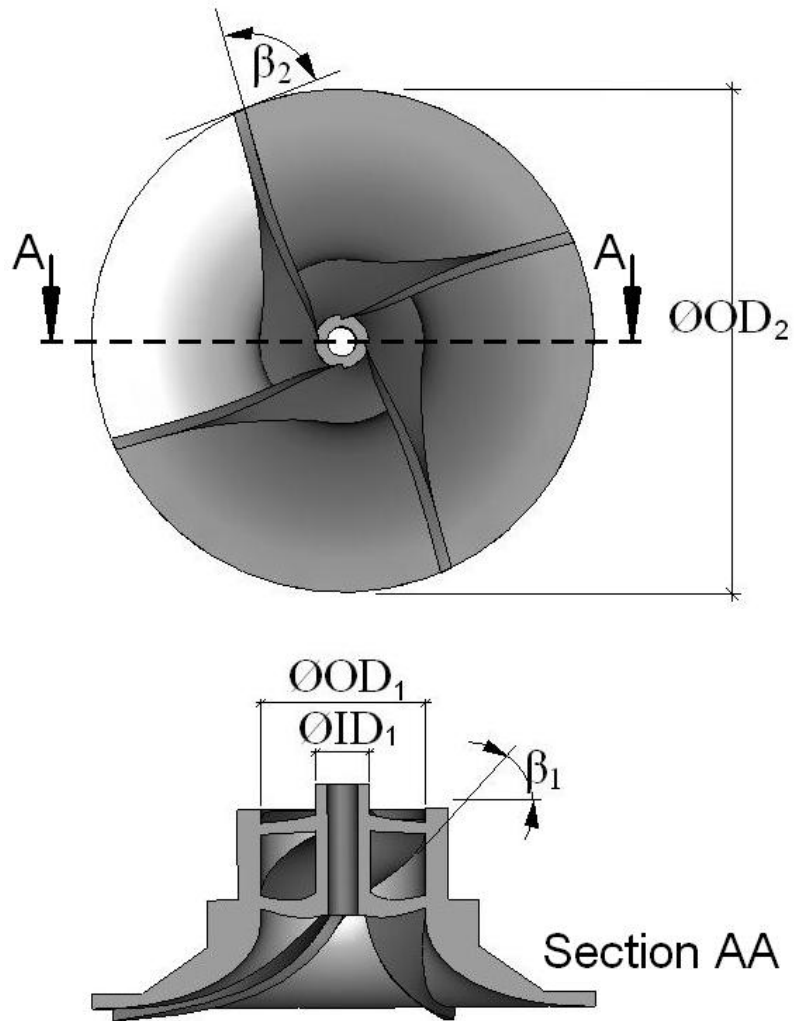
Bottom view and palm section of a completed CAD model of a dimensioned impeller that was used for testing.
